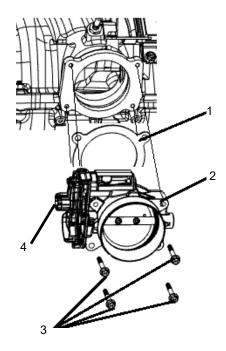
Throttle Body (2), Gasket (1), Retaining Bolts (3), Electrical Connector (4)
